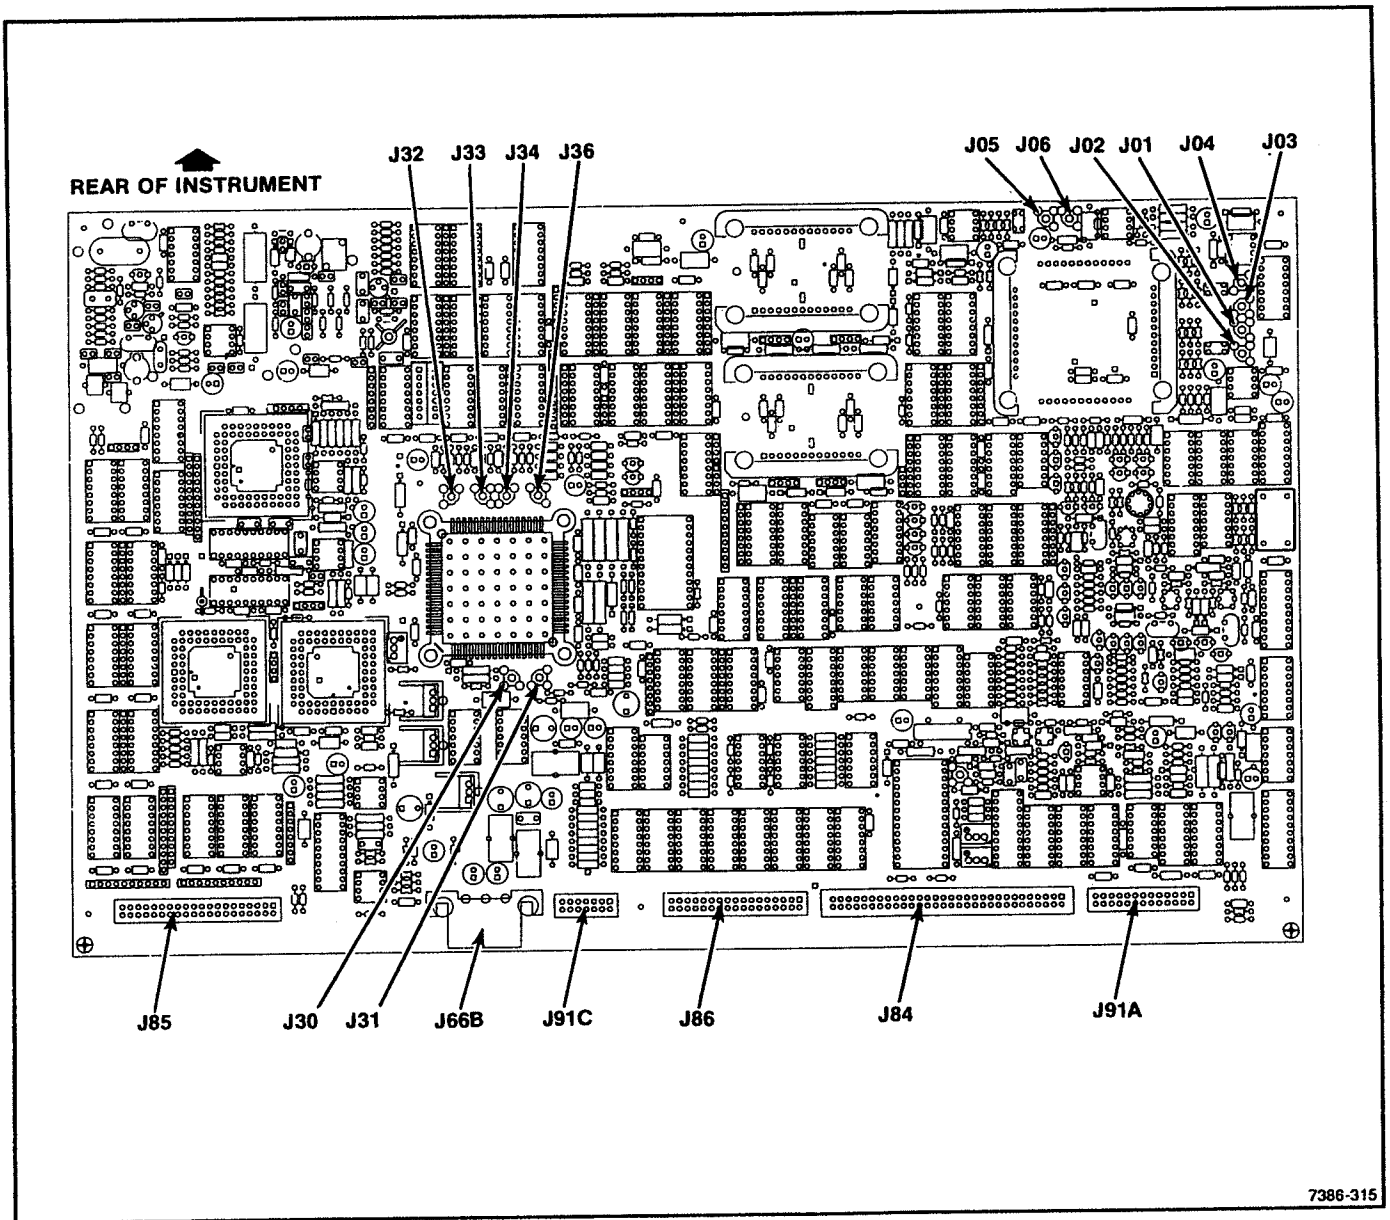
Connector locations for removal of the A5 Acquisition board.
